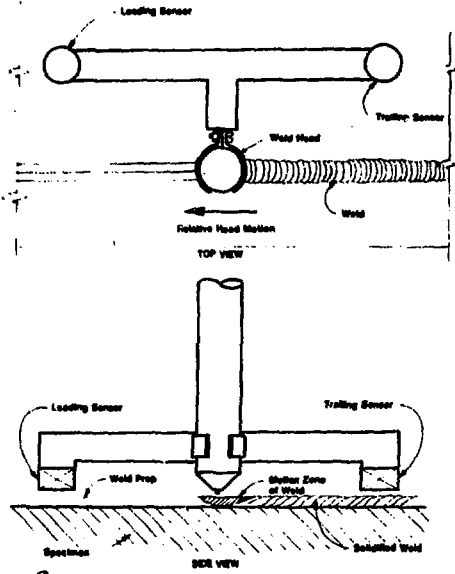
A typical arrangement for AE monitoring during continuous welding.
